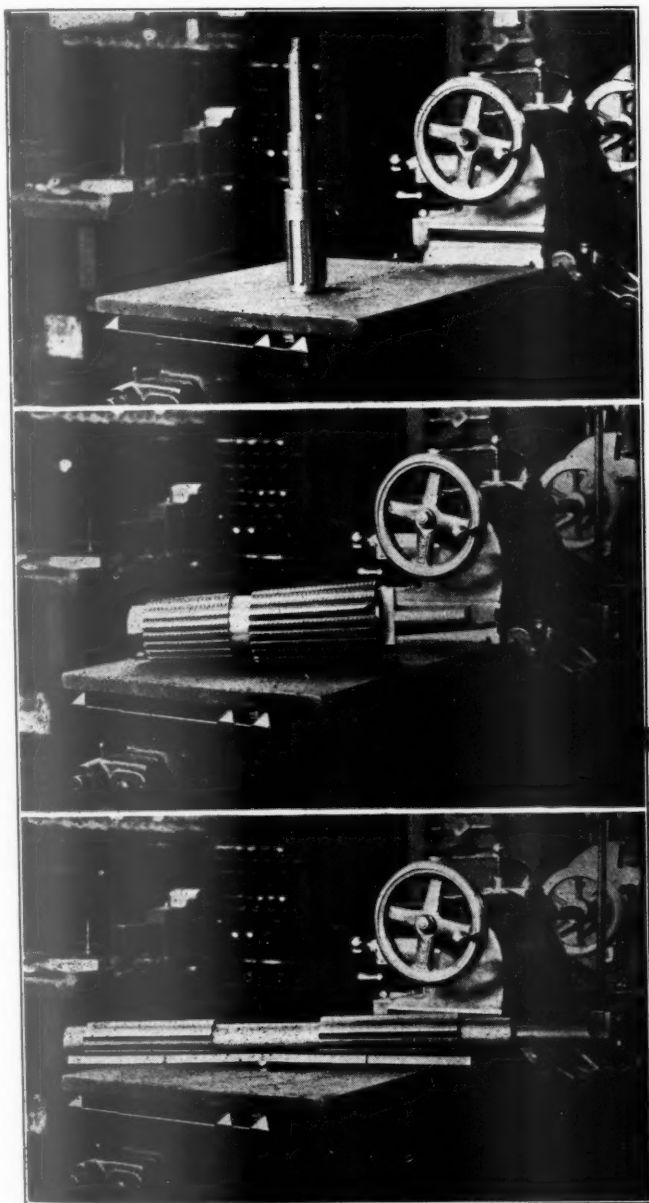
Top—General purpose reamer with removable blades; Center—Special tool for reaming crosshead wrist-pin fits; Bottom—Tool for reaming the bell-crank pin hole in a Baker valve gear
